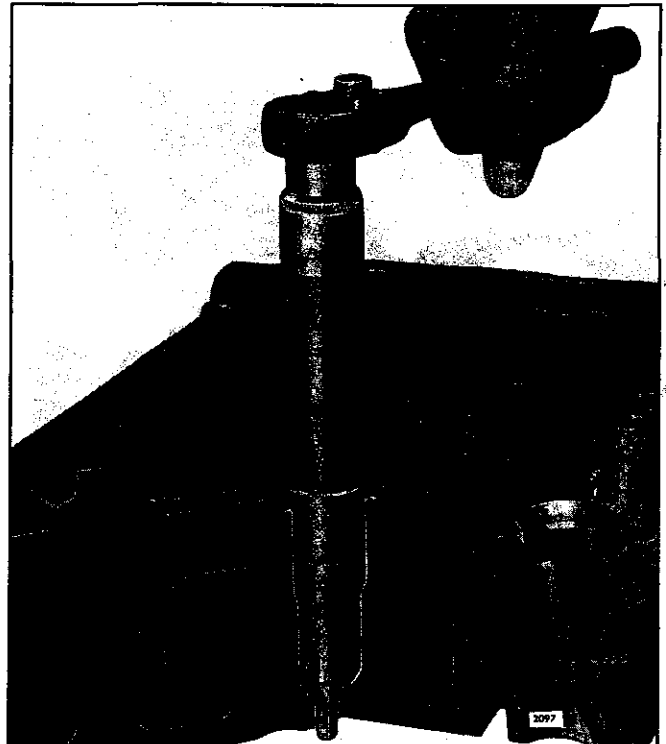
Reaming Injector Tube for Injector Nut Using Tool J 5286-9
